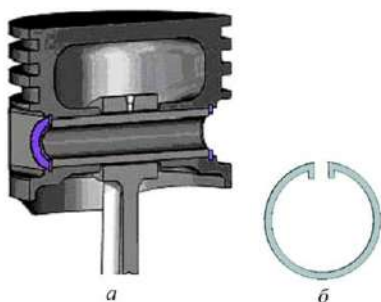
Fixing the floating piston pin: *a*– installation diagram; *b*– the main type of retaining rings
